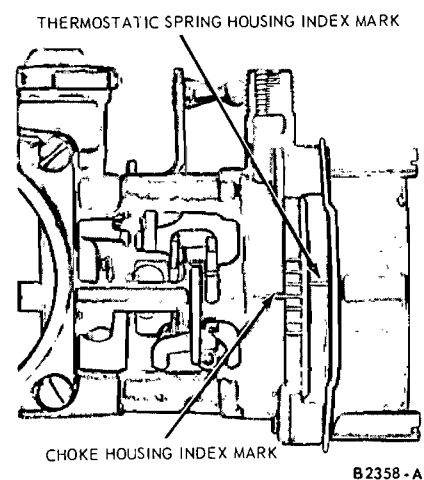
Automatic Choke Thermostatic Spring Housing Adjustment—Typical
